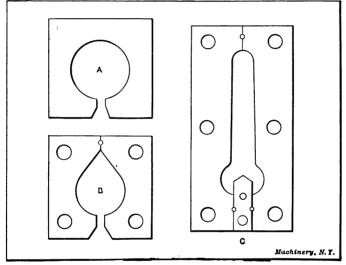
Trimming Dies: A, One-piece Hot-trimmer; B, Two-piece Hottrimmer; and C, Three-piece Cold-trimmer
